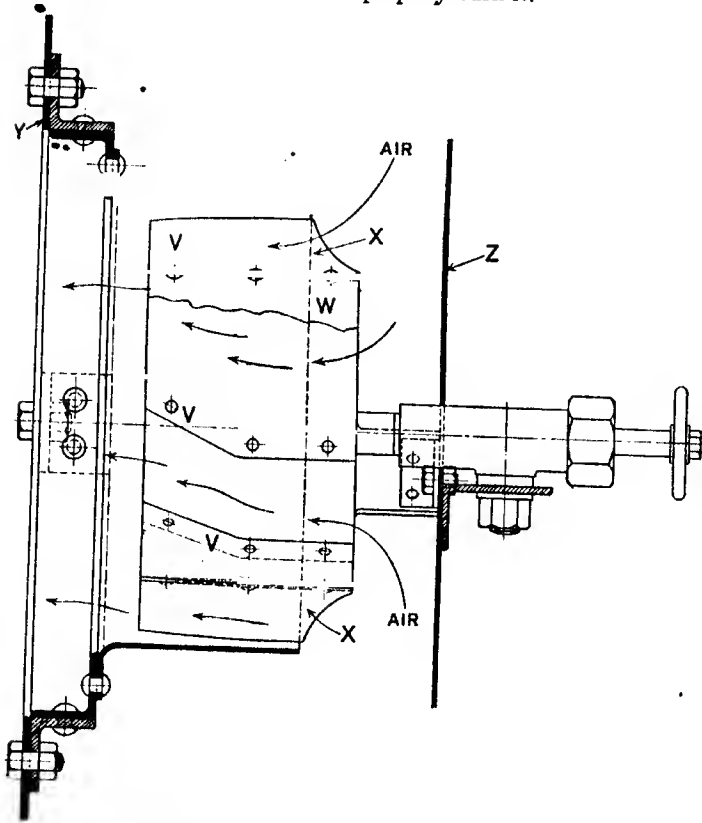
General arrangement of oil fuel burner on front of a water-tube boiler.
